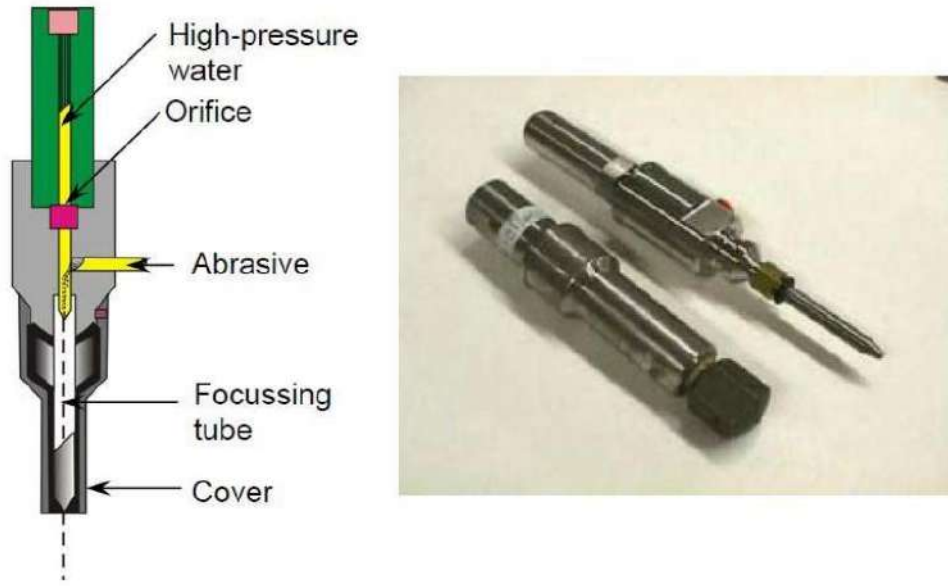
Schematic and photographic view of the cutting head (Photograph Courtesy – Omax Corporation, USA).
